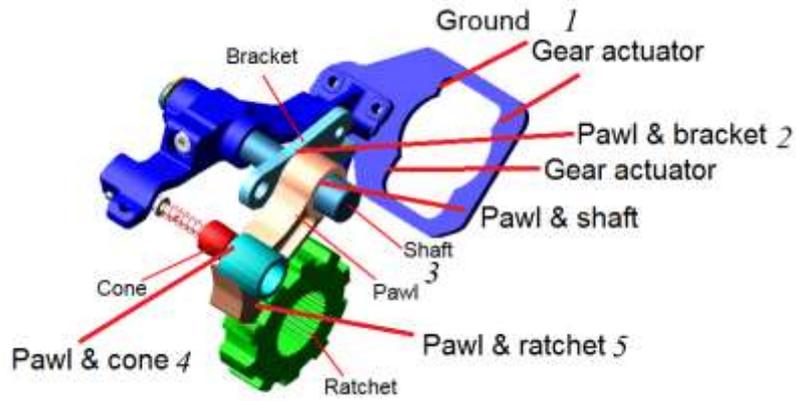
The park lock mechanism with tribological system pointed out, (1) gear actuator & ground, (2) pawl & bracket, (3) pawl & shaft, (4) pawl & cone and (5) pawl & ratchet wheel.
